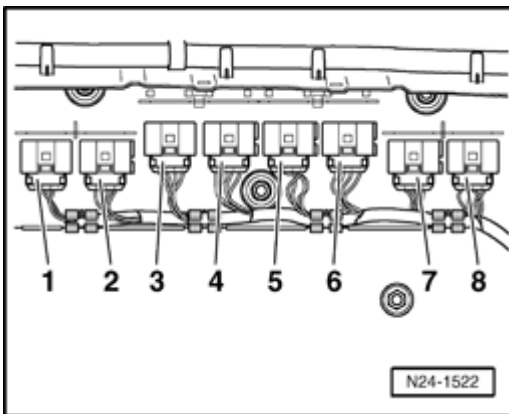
Component Location Of Oxygen Sensors Harness Connectors For Bank 2
